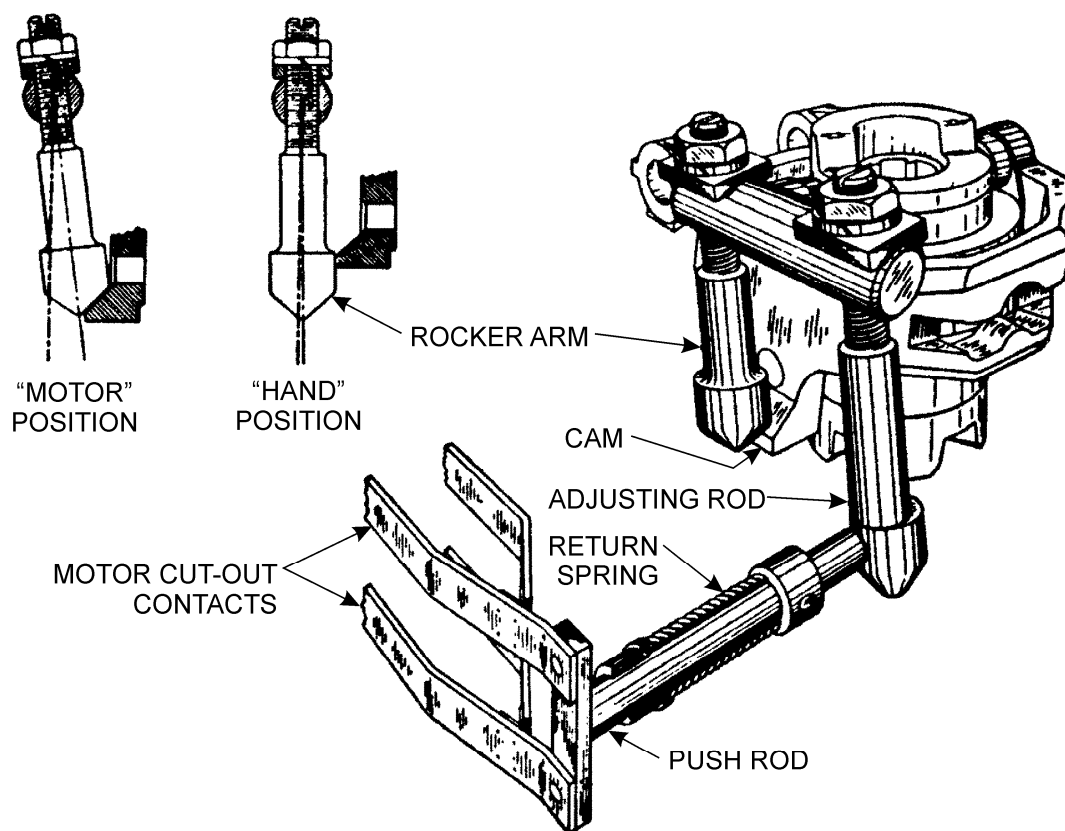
Motor Cutout Contact Assembly (M-23 Machines)
